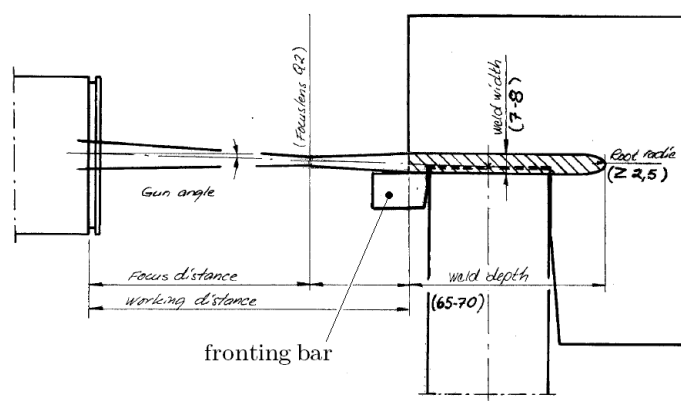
Fronting bar in horizontal electron beam welds; adapted from [31]
